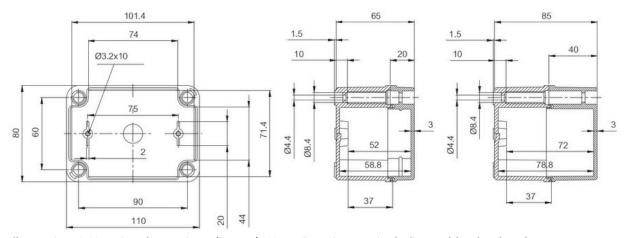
Housing dimensions (in mm). Note: Drawing not including cable gland and sensor.
